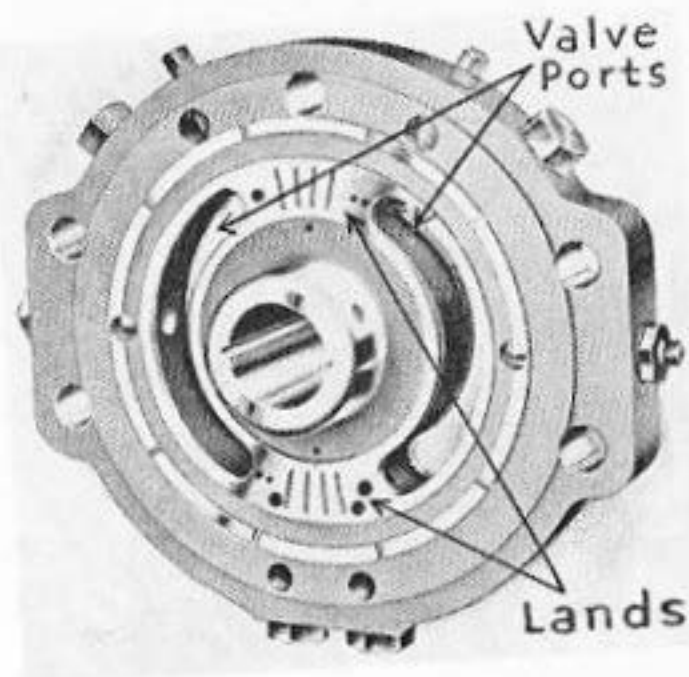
Midplate of Valveplate. (Showing the A-Face).
